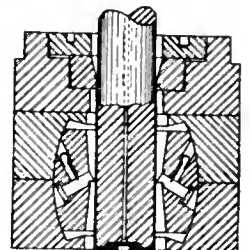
SECTION OF FIFTH DRAW DIE.
